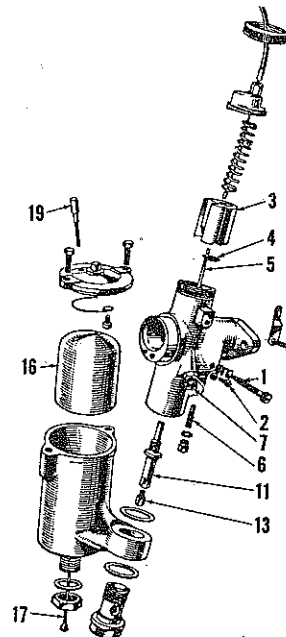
Exploded view of Amal Monobloc carburetor typical of that used on some models. Refer to Fig. TM1-1 and the following for legend.
